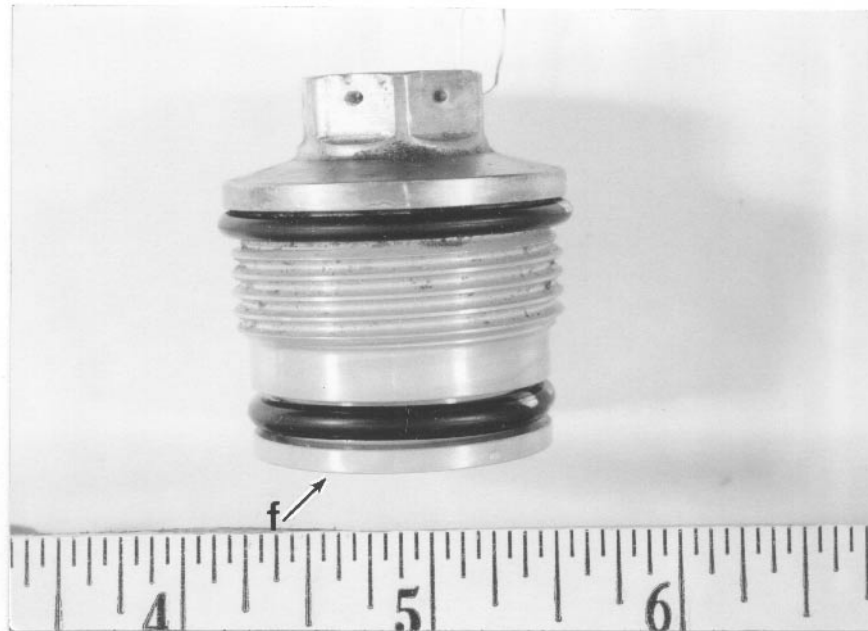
As received view of the servo cap. Arrow "f" indicates the face that in the servo valve assembly butts up against the seating surface on the servo valve (see arrow "ss" in figure 1).
